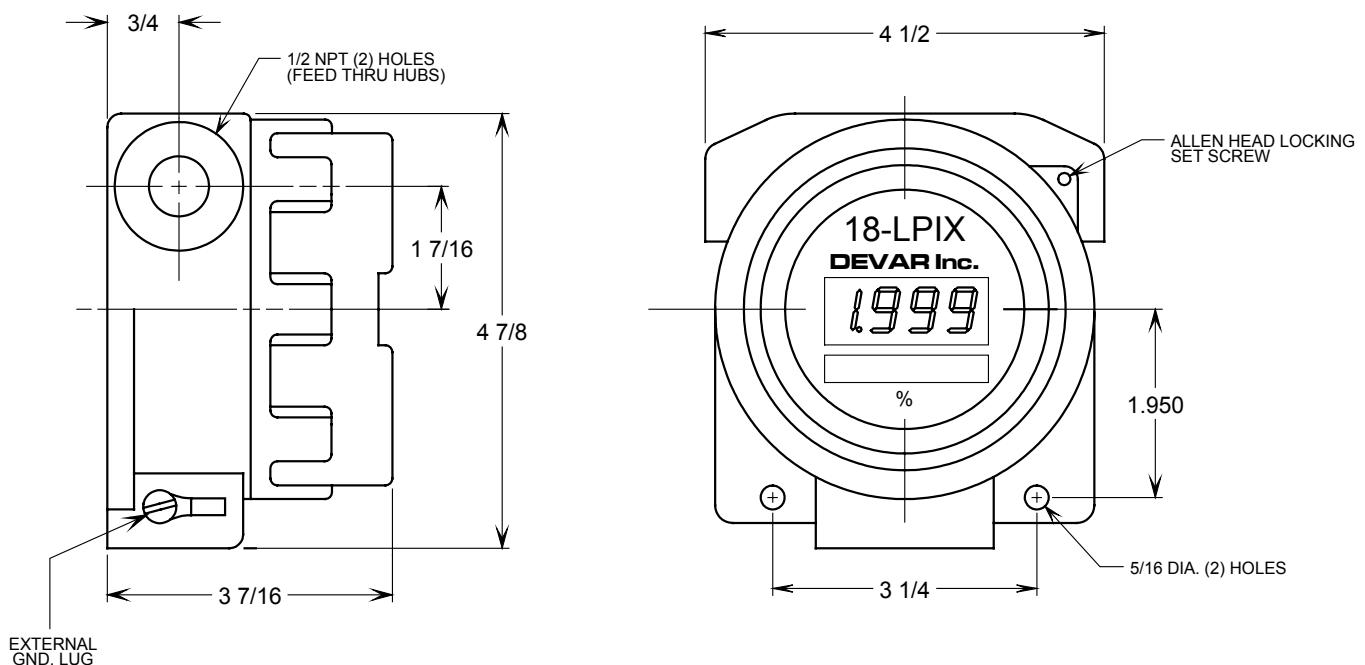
EXPLOSION PROOF MODEL 18-LPIX
